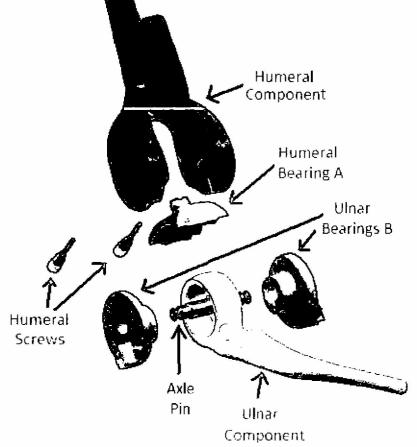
The Zimmer Nexel Total Elbow, exploded view
